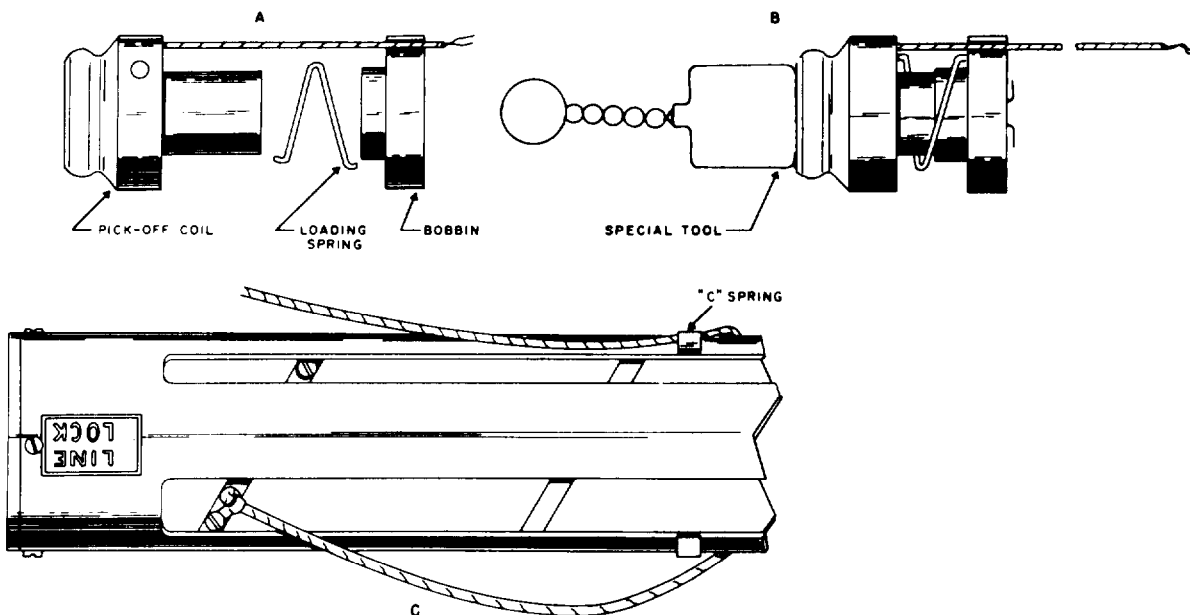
Reassembly of Delay Line Pickoff Coils
